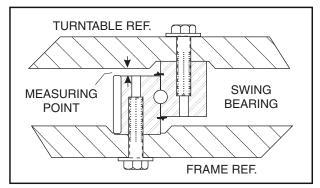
Swing Bearing Tolerance Measuring Point
